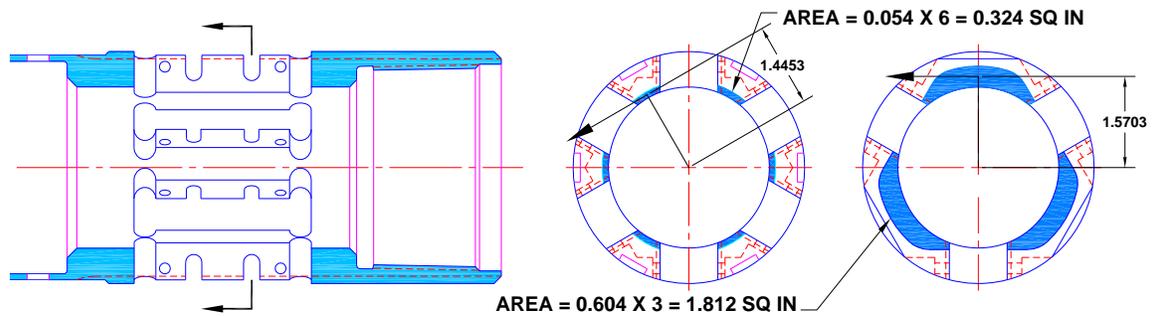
, Outer Latch Housing with stronger garter spring grooves, original left, improved right.
